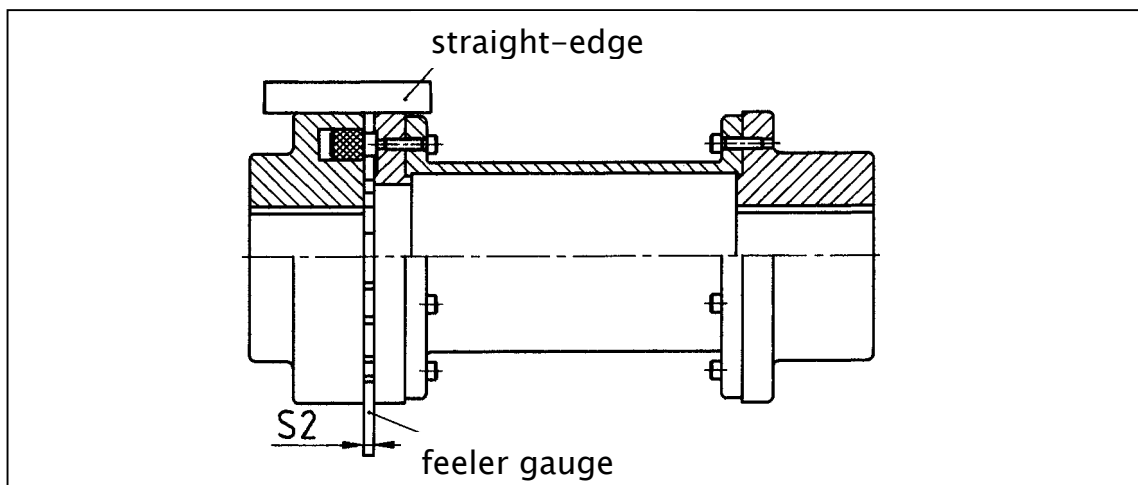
Intermediate sleeve coupling, measurement using feeler gauge and straight-edge.
